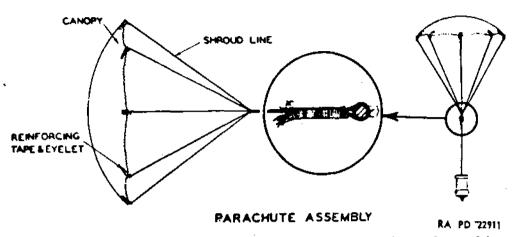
SHELL, Illuminating, M83 — Parachute Assembly
